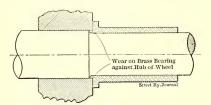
SHOWING WEAR ON BRASS BEARING AGAINST HUB OF WHEEL
